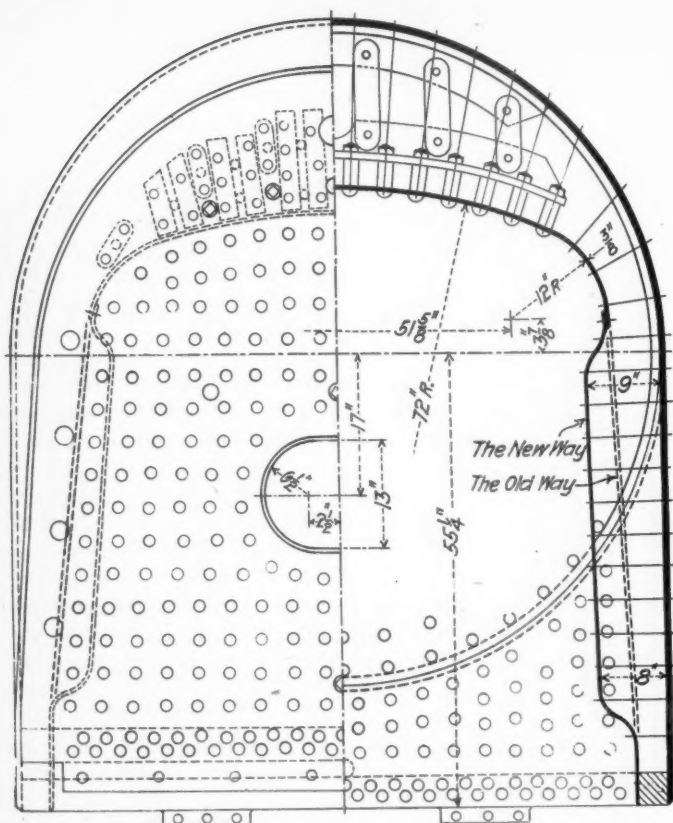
SMYTHE'S OFFSET SIDE SHEETS.
